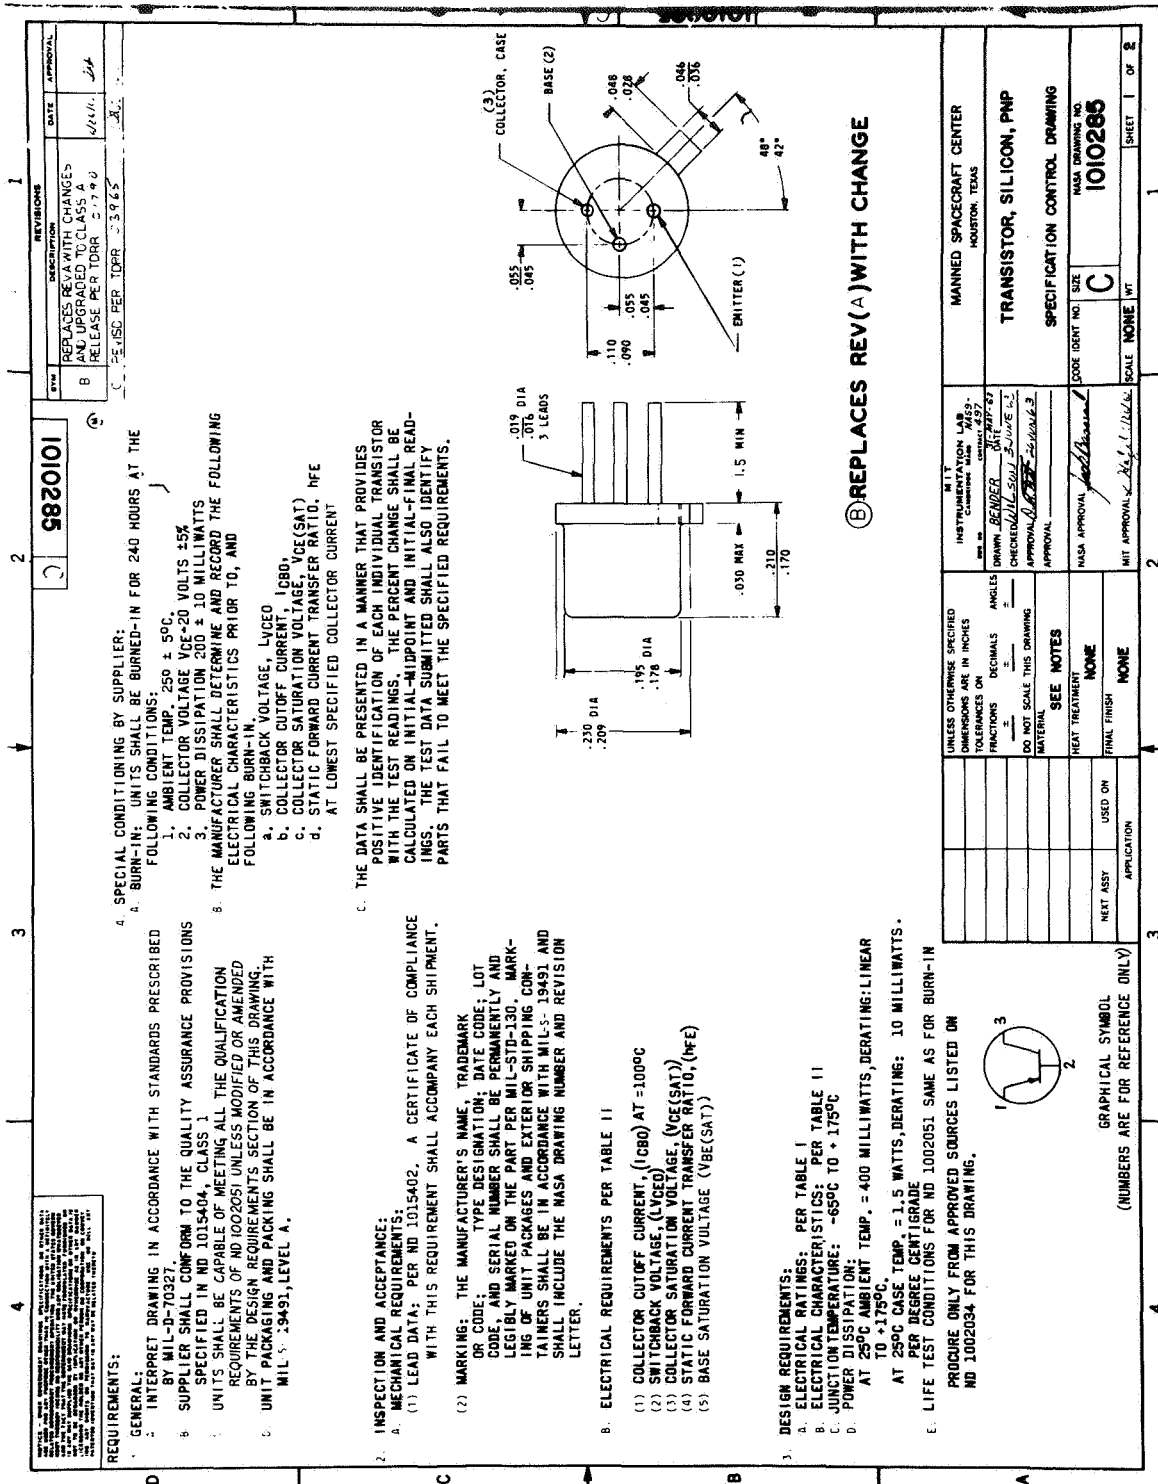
Sample Specification Control Drawing (Sheet 1 of 2).
